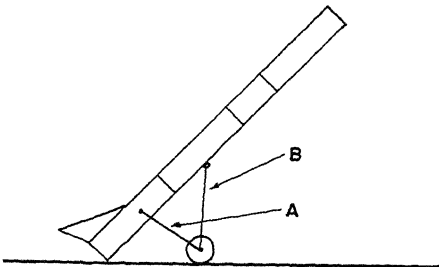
Undercarriage construction of typical farm elevator. Member A is pinned to the trough frame. Member B is winched along trough frame to control discharge height.
